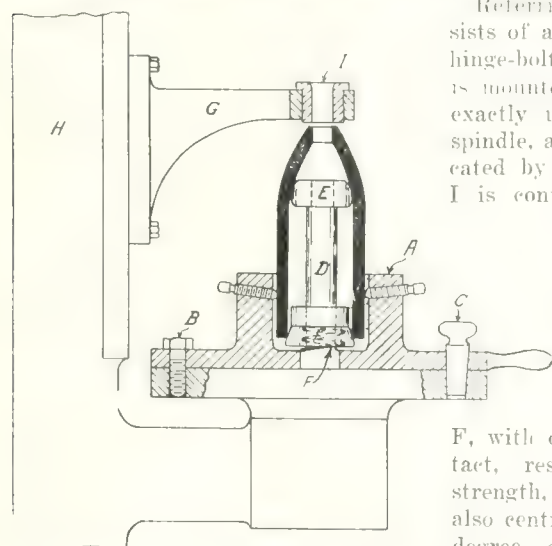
FIXTURE FOR CENTERING AND DRILLING SHELL FORGINGS IN DRILL PRESS
